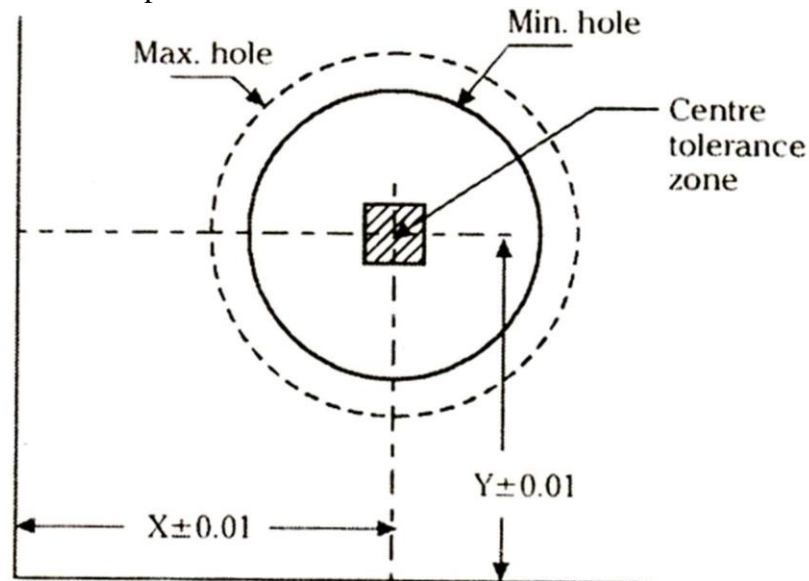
Square Tolerance Zone produced by Co-ordinate Tolerances.
